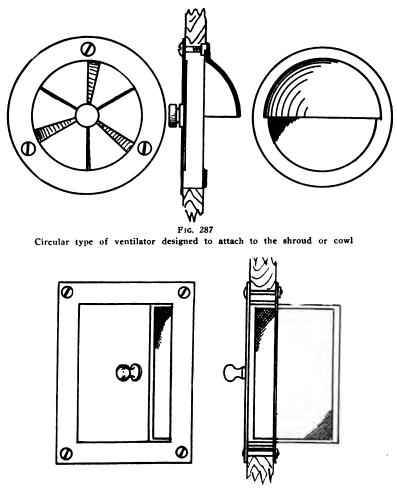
Sliding plate type of ventilator designed for top of shroud or cowl
